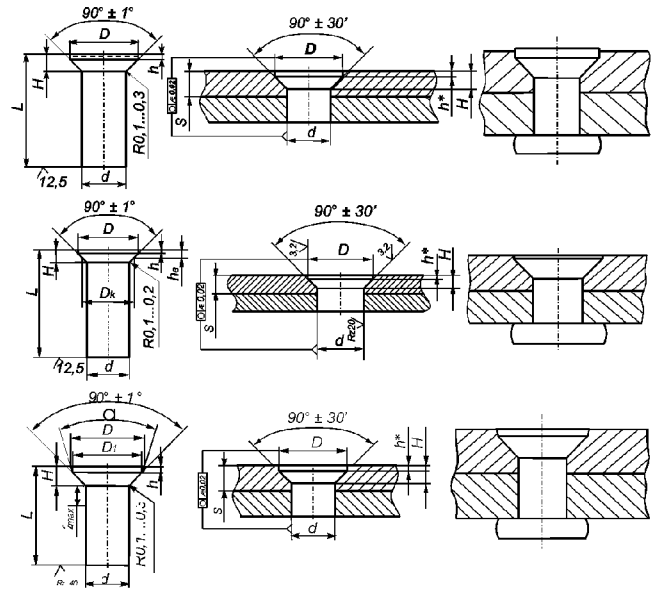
New Countersunk Rivet Structure with Cylindrical Compensator and Holes for Their Setting
